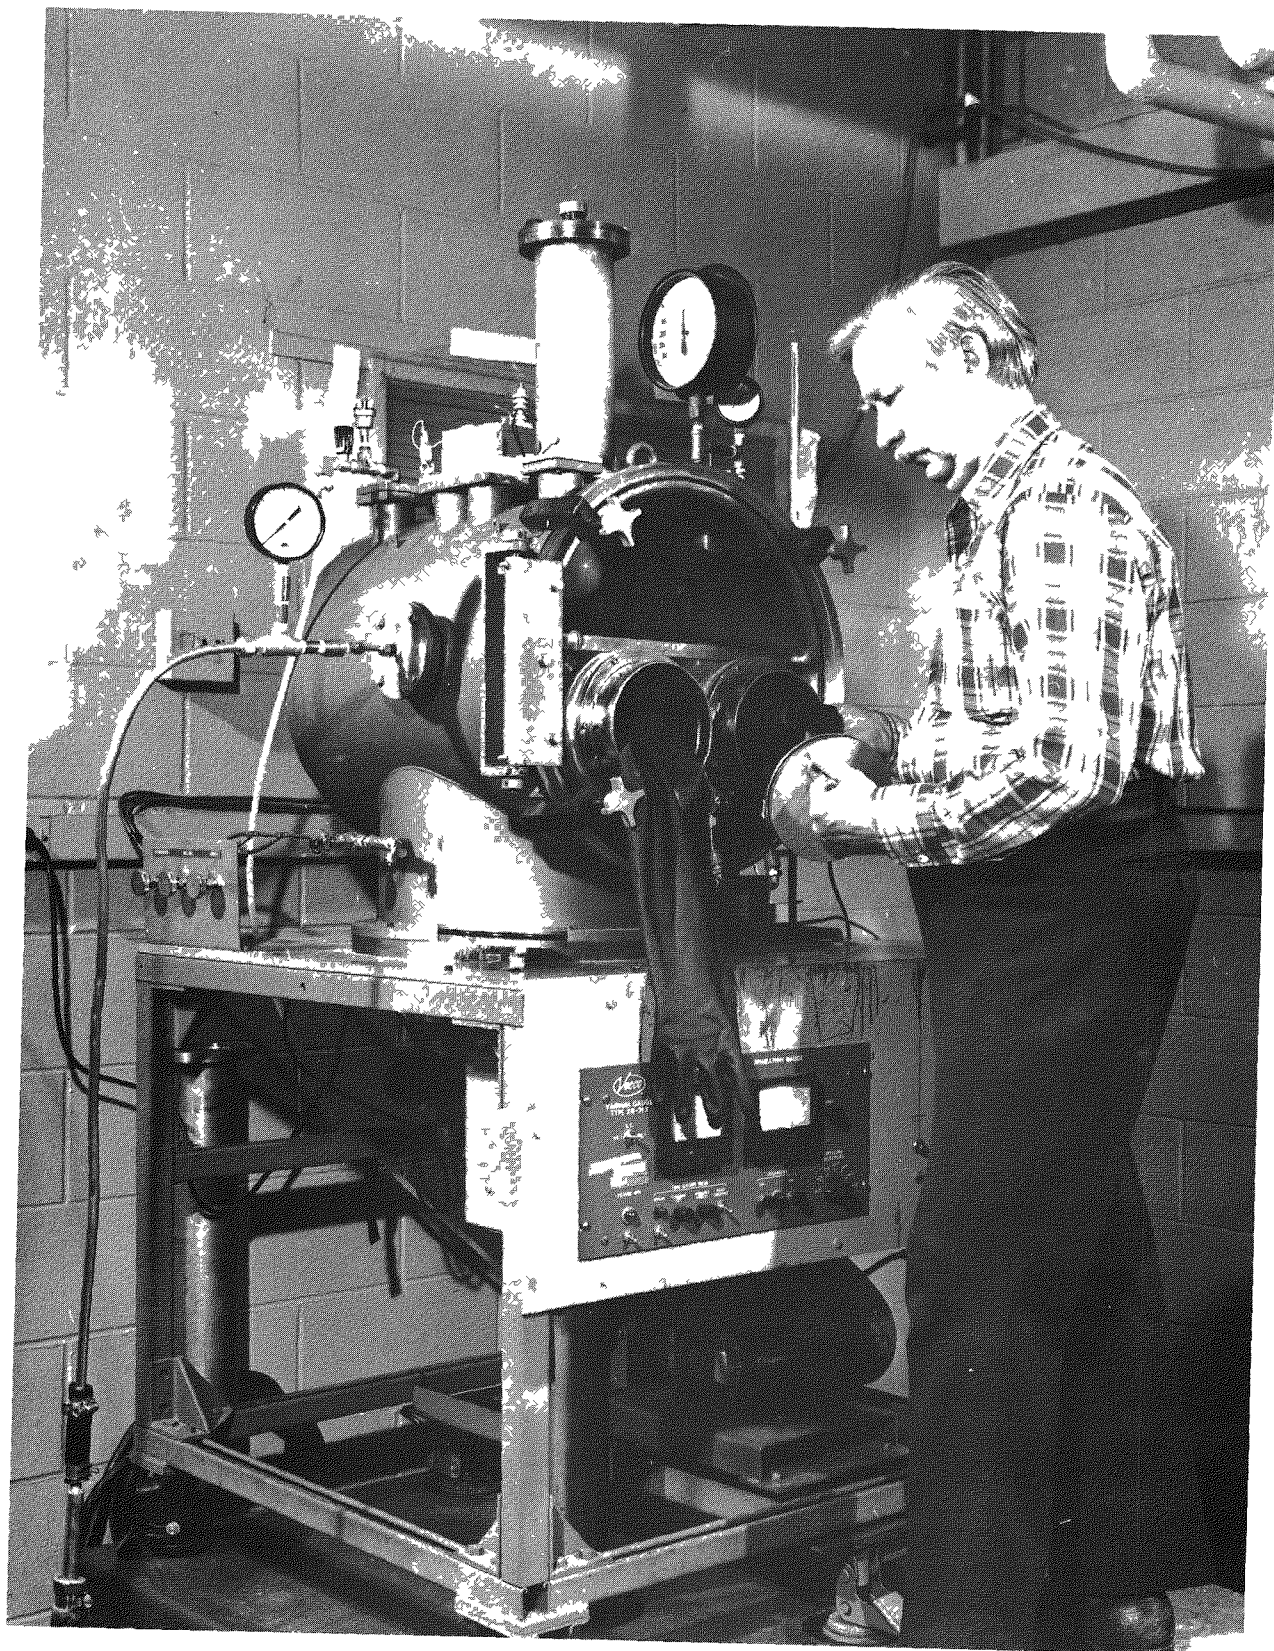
Controlled-atmosphere Welding Chamber in Which a Fuel-centerline-thermocouple Preassembly Was Joined to a Fuel Element. ANL Neg. No. 104-77-99
